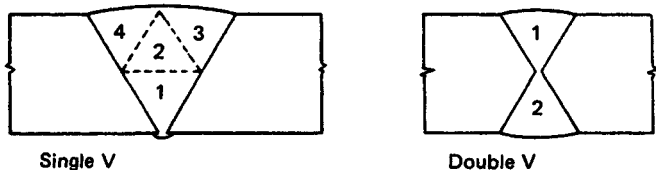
Using a double-groove joint in place of a single-groove joint reduces the amount of welding. (*The Lincoln Electric Company.*)
